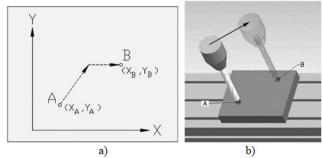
a) Toolpath, b) Position of the cutting tool [5]
